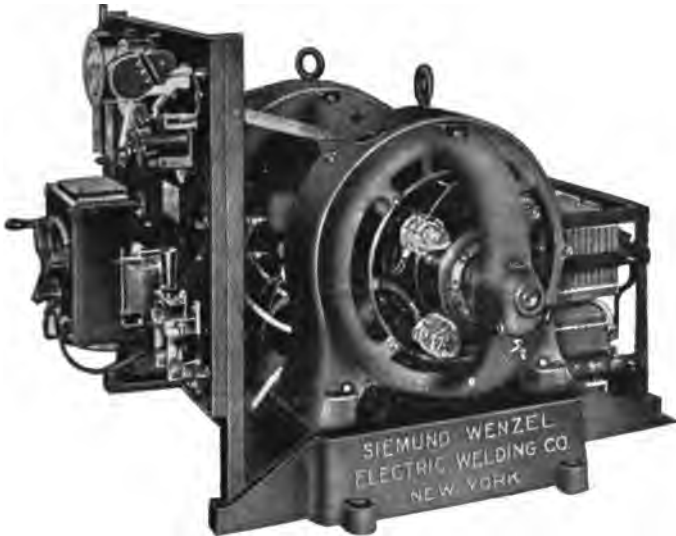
Single Welder Siemund-Wenzel Unit
